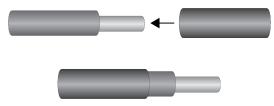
Sliding a Heat-shrink Tube Over the Grounding Wire
